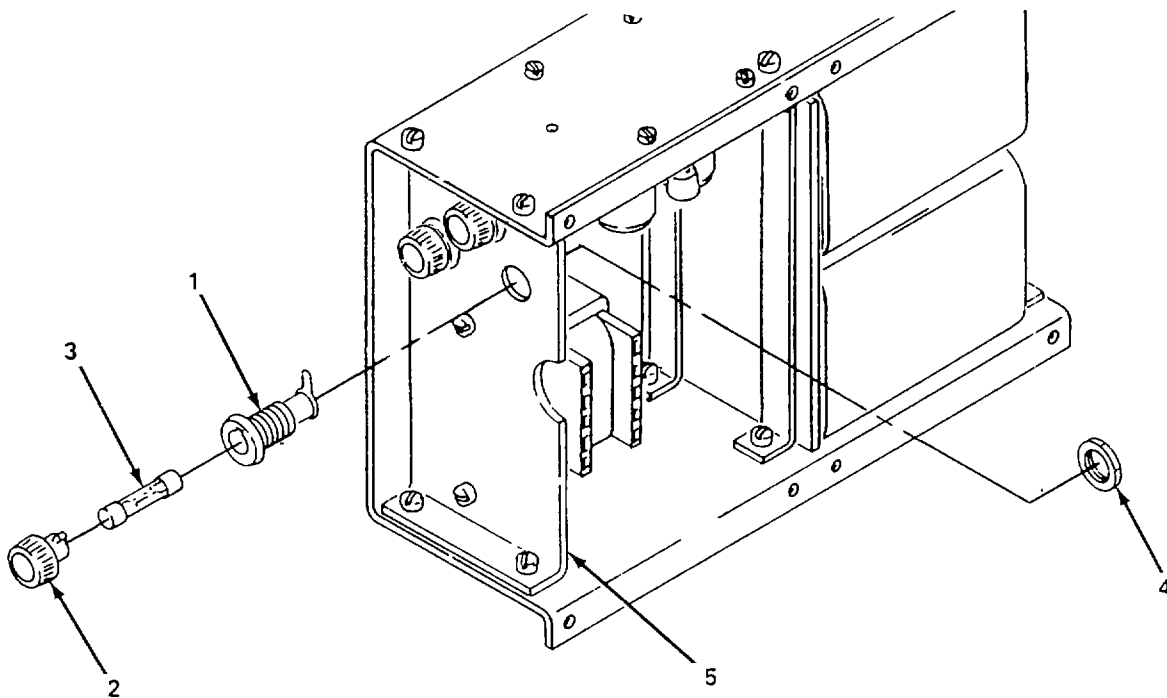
Battery Card and Case Fuse Holder, Replace.
